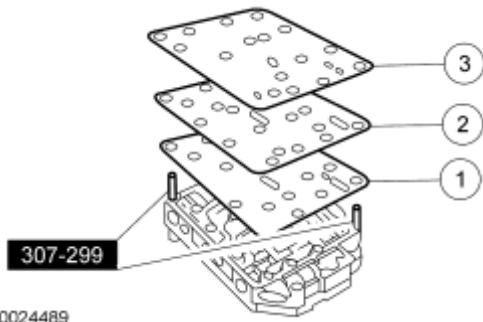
Installing Accumulator Body Separator Plate & Gaskets
